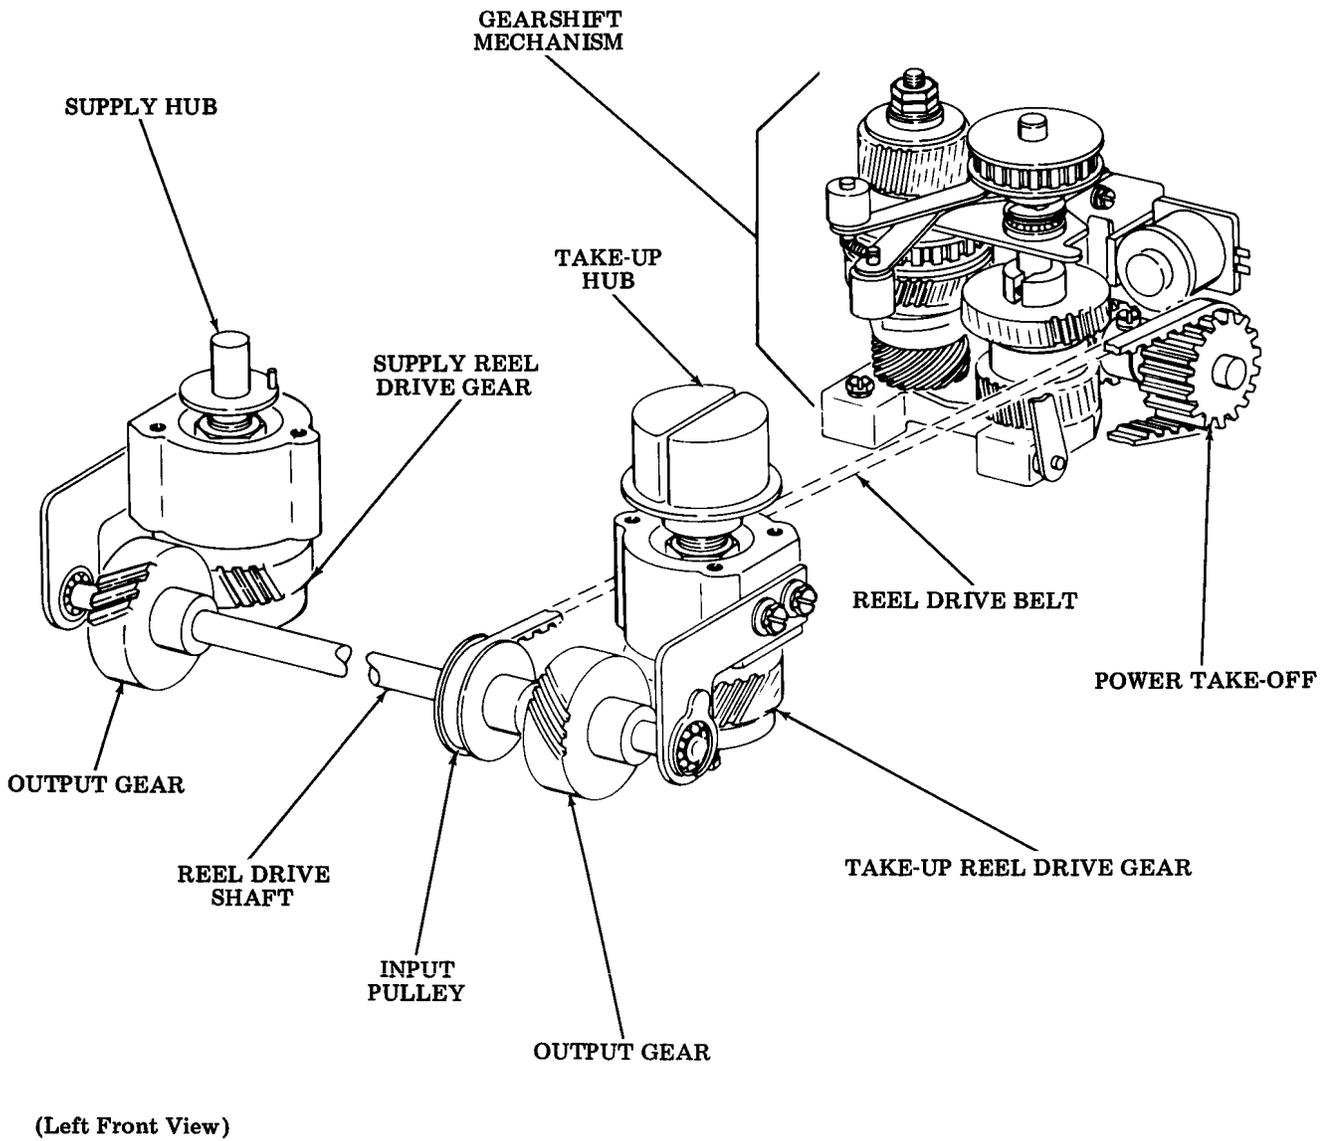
Gearshift Mechanism With Reel Drive Mechanism
